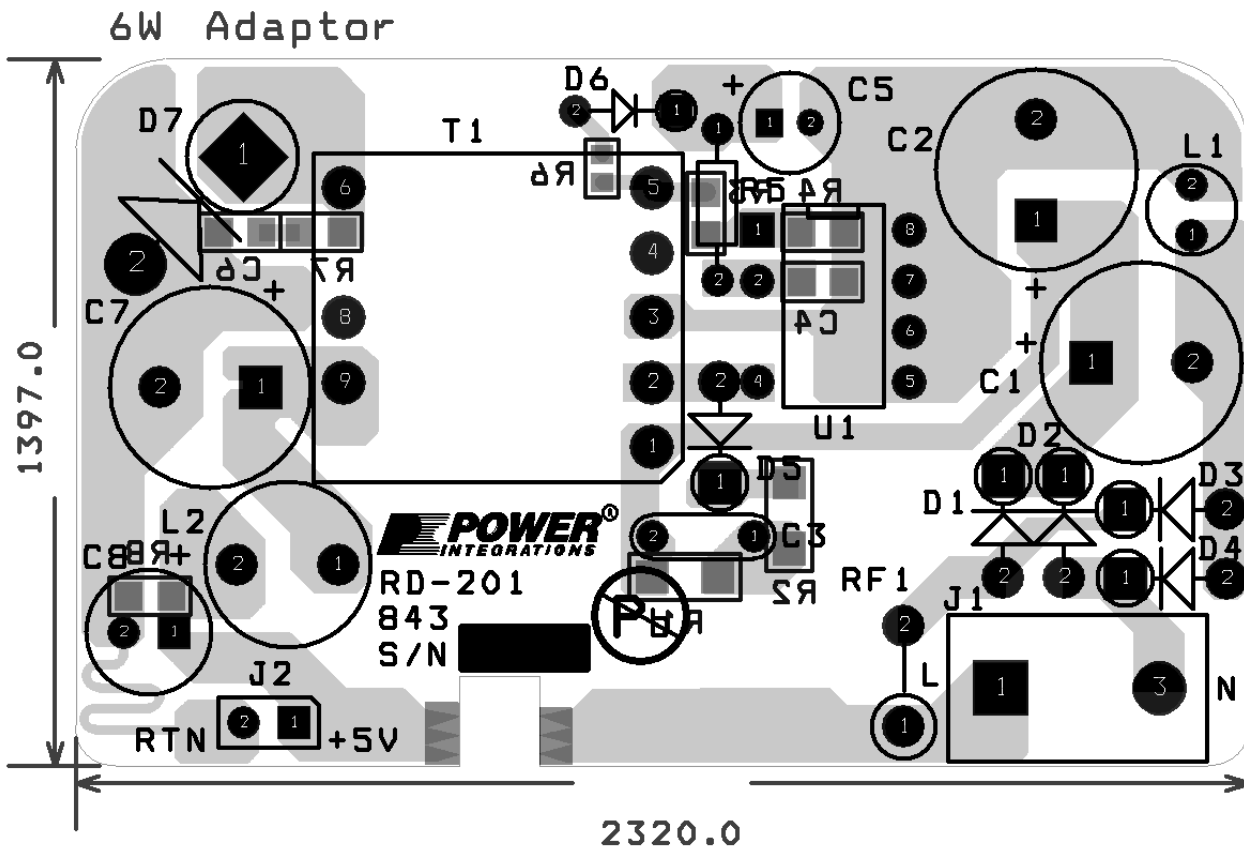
Printed Circuit Layout, dimensions in mils (one thousandth of an inch).
